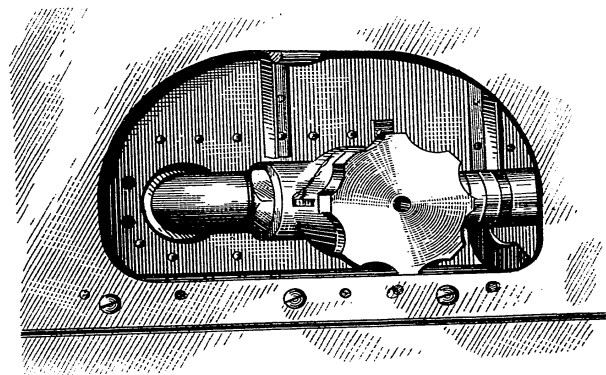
COCK FOR DRAINING FUEL FROM LOWER TANKS, INSTALLED NEAR FRAME NO. 14, FRONT OF CARGO COMPARTMENT FLOORING CENTRAL HATCH.
